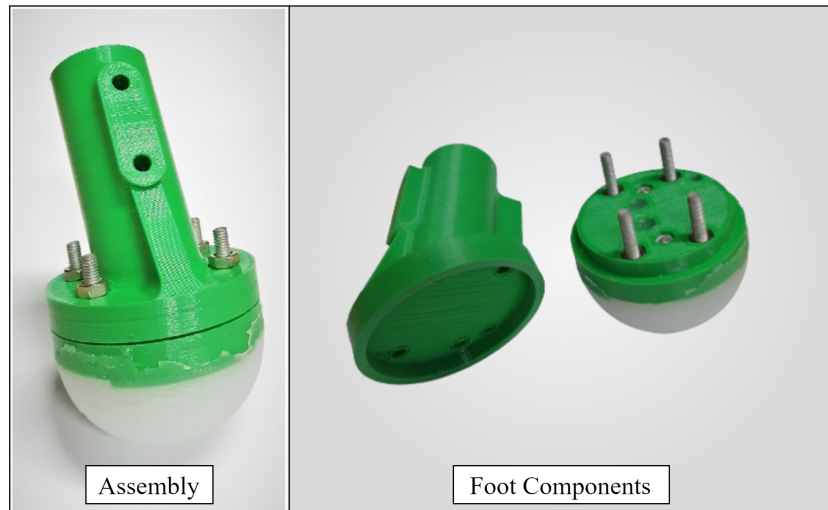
An initial 3D printed and molded concept of the foot assembly including the individual components of the foot. Note the uniform circumferential finish of the foot sole acquired during the molding process using silicone rubber compound.
